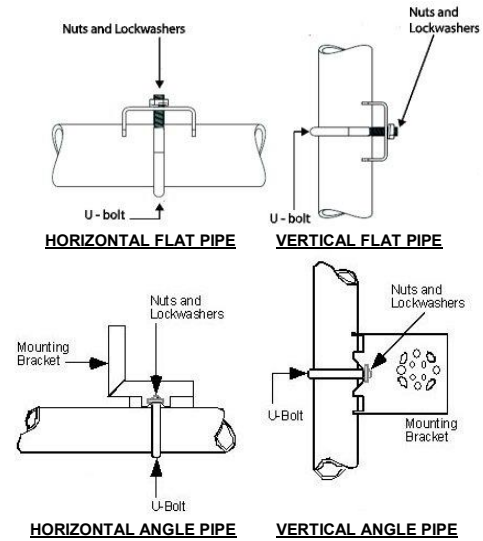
Flat and Angle Mounting Brackets secured to Horizontal or Vertical Pipe
